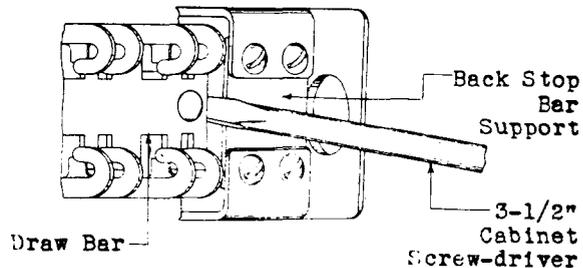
Method of Relieving Draw Bar Link of Spring Load
